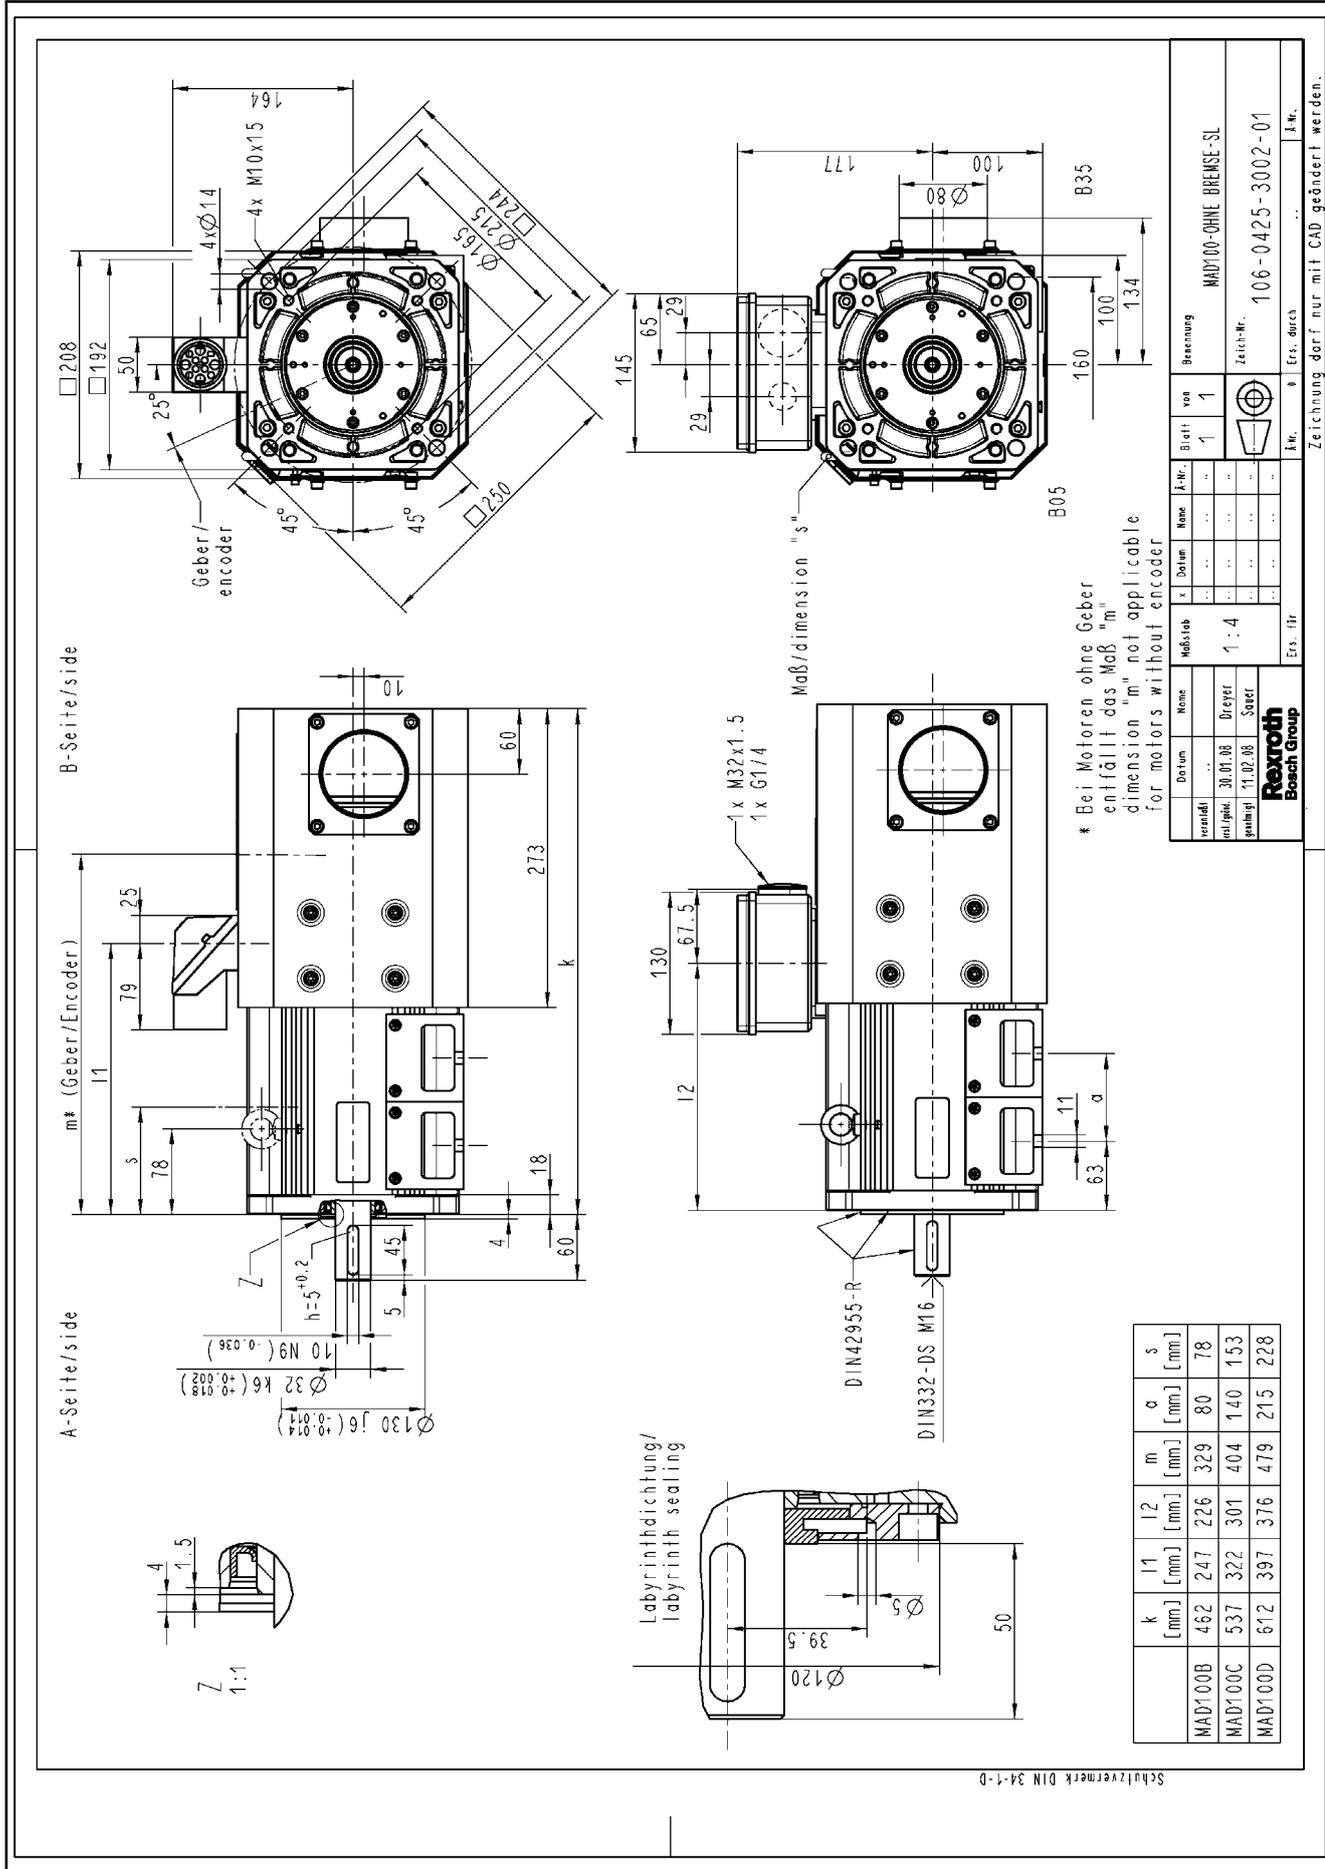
Dimension sheet MAD100 with SL cooling, without holding brake
